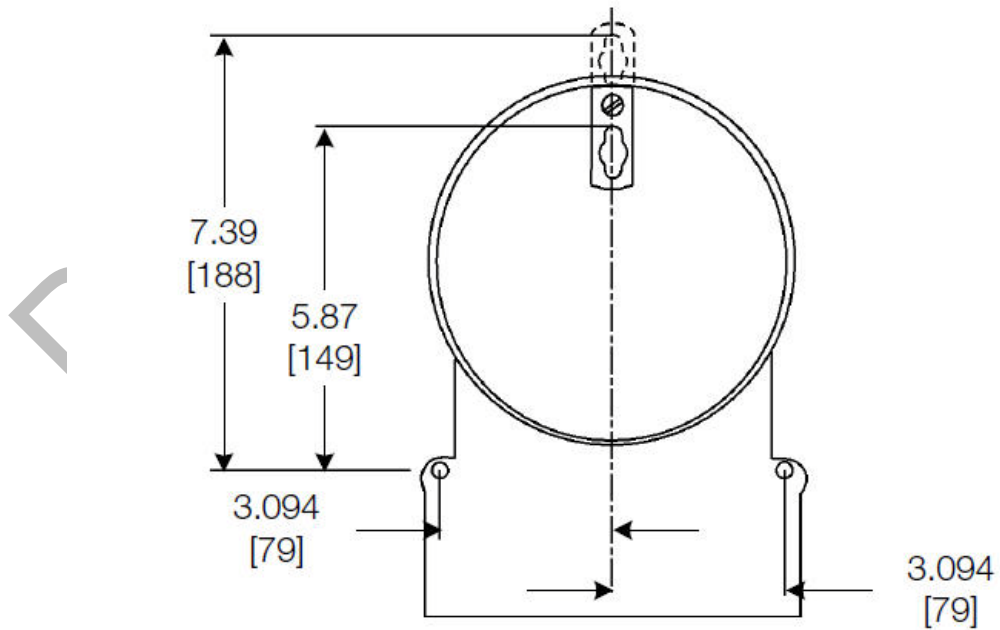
3. A-base Meter Type and Dimensions in Inches (millimeters) - Back View
